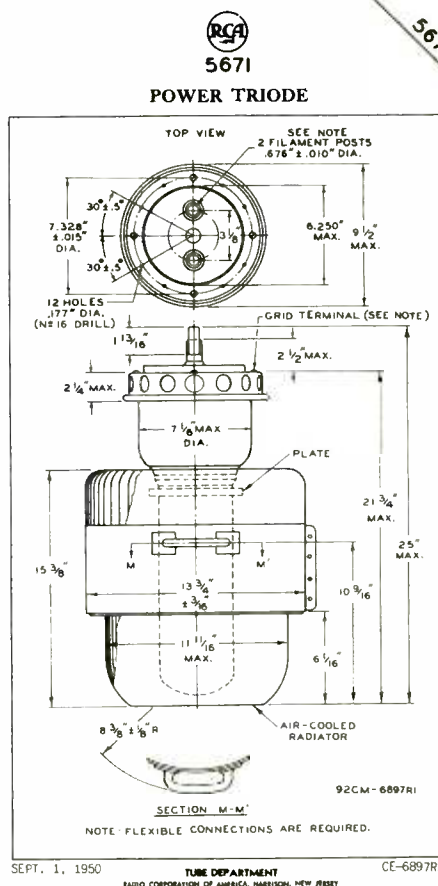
Outline drawing of the Type 5671 Power Triode, showing its outline and dimensions.
